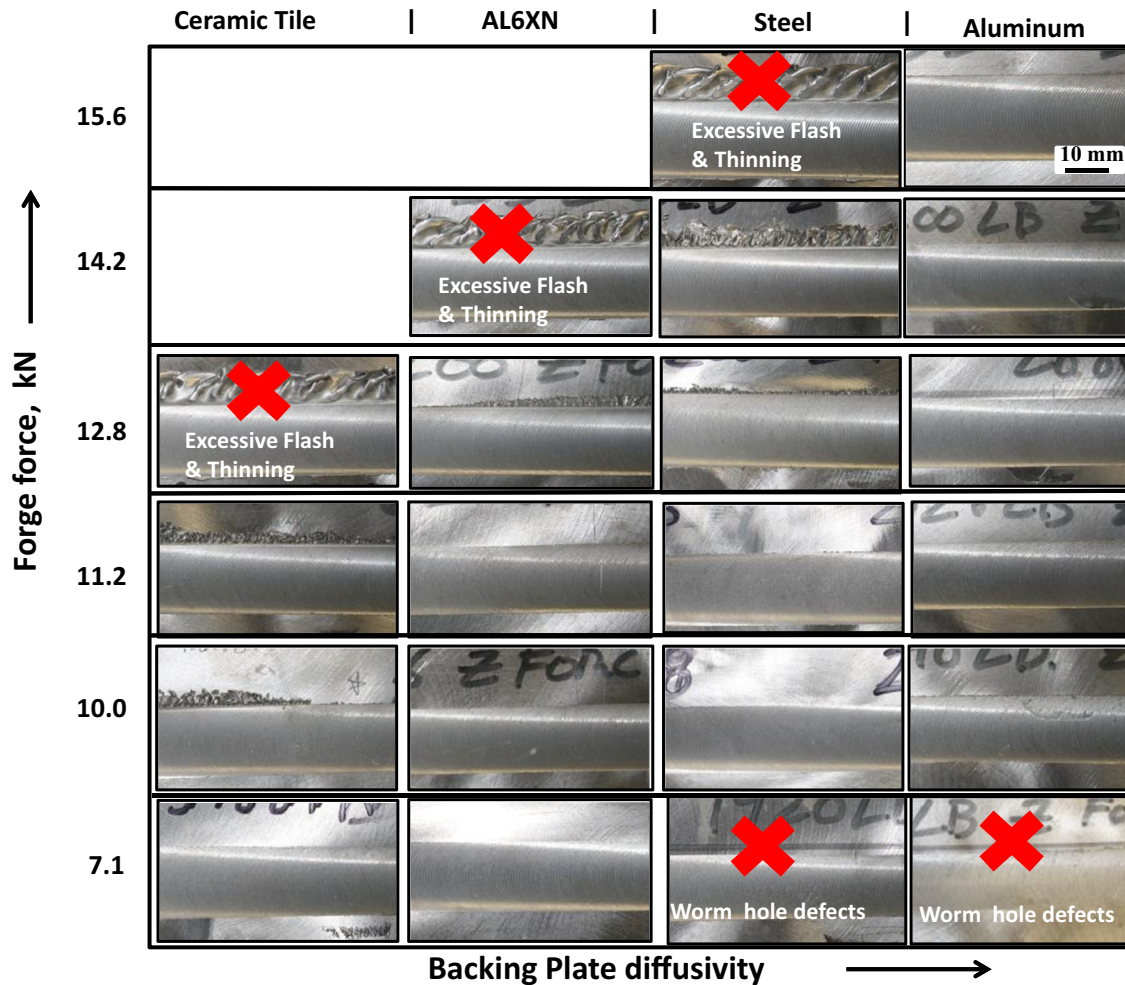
Representative weld surfaces from series of welds made at 640 rpm and 6.8 mm/s in 4.2-mm-thick AA6056. Welds made with different BPs are shown in different columns, while each row shows welds made at the indicated forge force. The scale is shown on the top right corner applicable for all the individual images.
